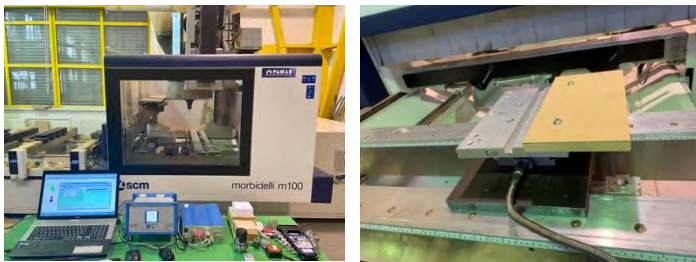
Kistler measuring system and CNC machine; Clamped MDF sample on Kistler measuring equipment
